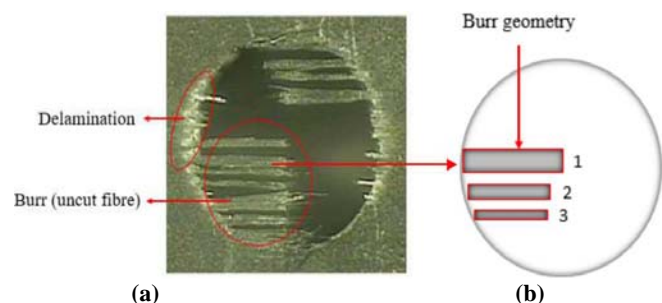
Burr formation due to drilling of unidirectional CFRP composites (a) and defined burr geometry (b) [5].
